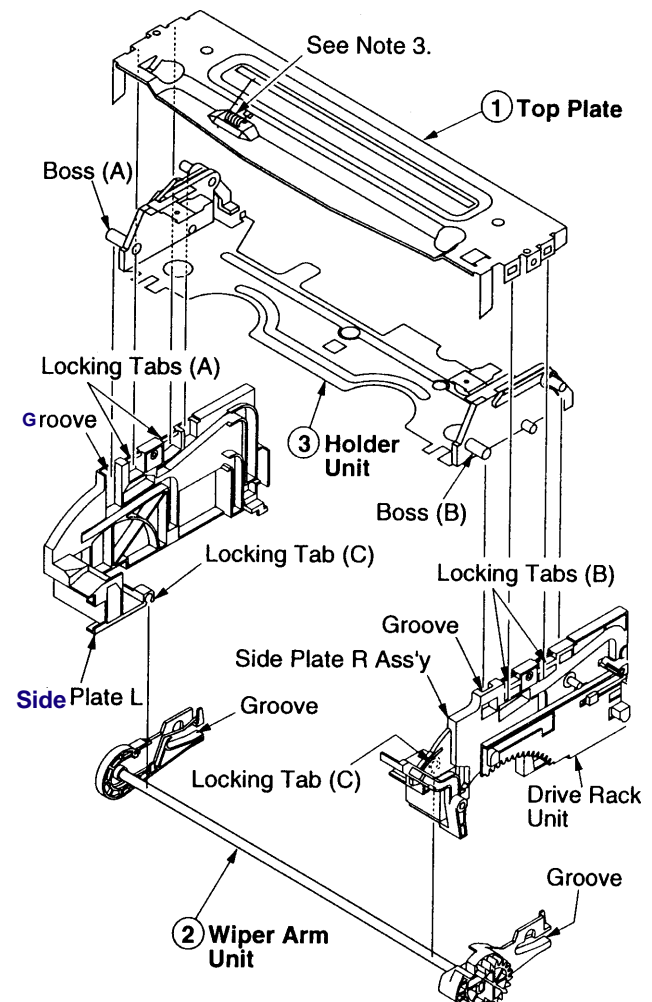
Top Plate/Wiper Arm Unit/Holder Unit Disassembly
